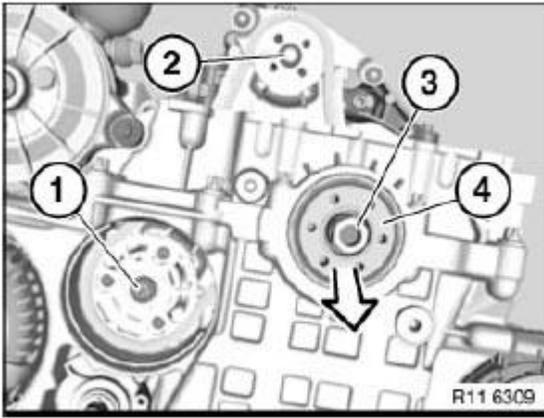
Identifying Sprocket Wheel Screws, Central Bolt And Front Hub
